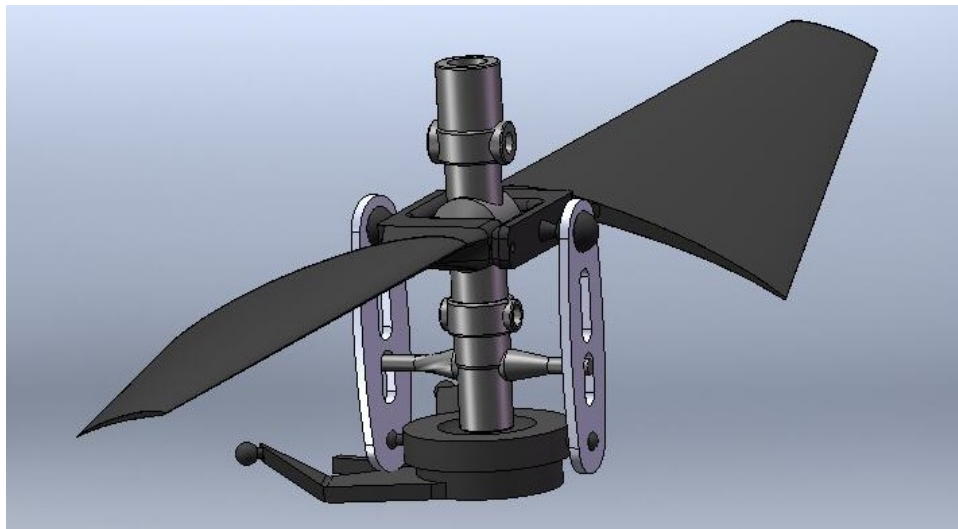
CAD rendering of optimized rotor blades with swash plate assembly.
